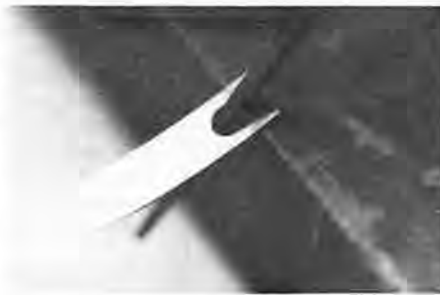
Four-sided file cutting approximately 30° angle into holding edge of hole.
